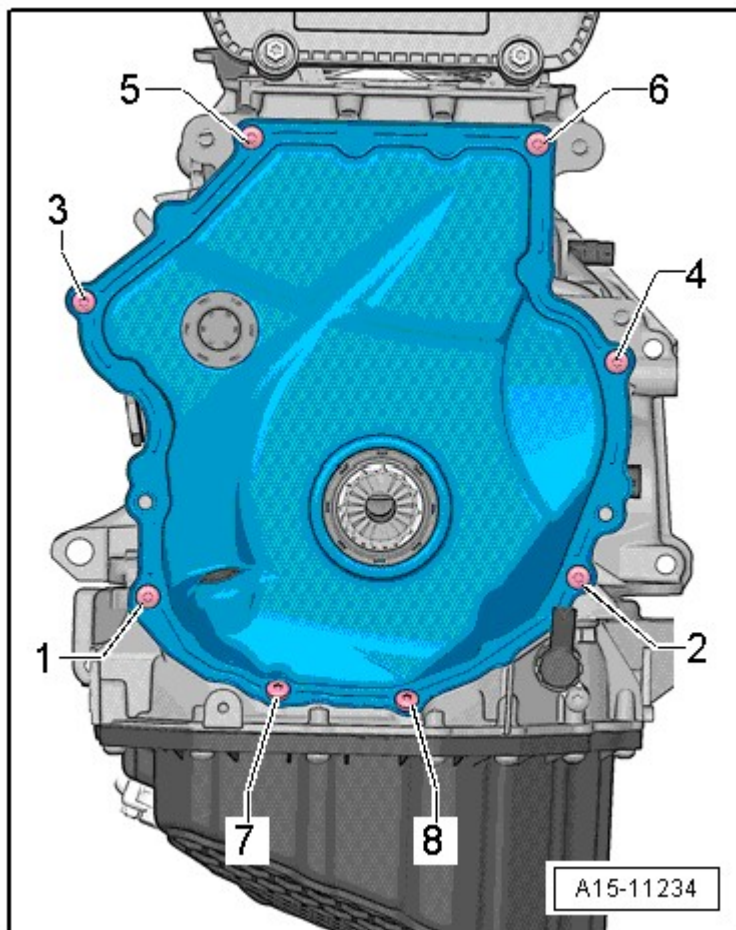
Identifying Timing Chain Guard Lower Section - Tightening Sequence for 8 Bolts
